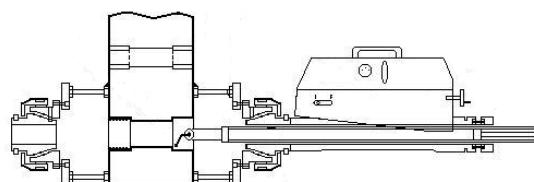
MIG/MAG (GMAW) build-up welding equipment [6]
